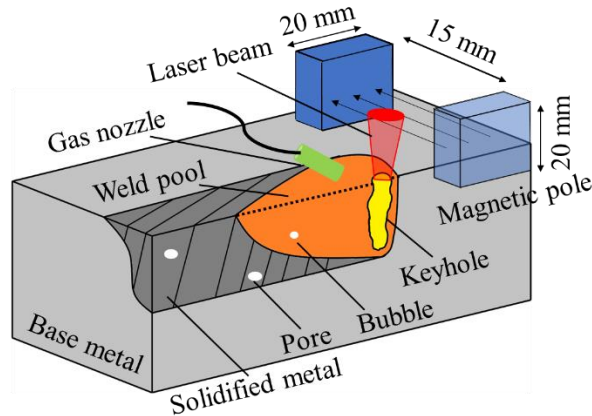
Setup of the Laser Beam Welding experiments
